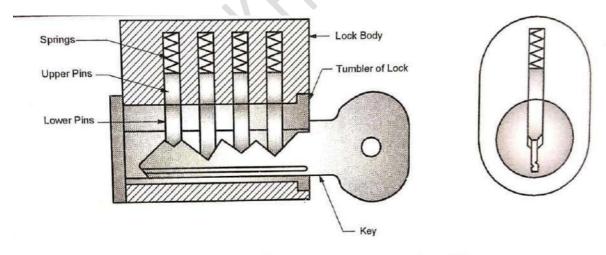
Door Lock [Refer Color Pic.C.6.9]
